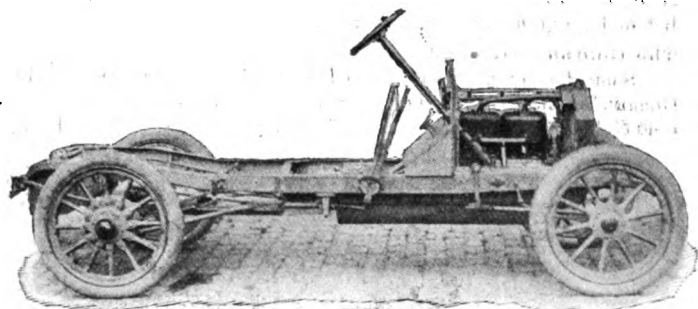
Chassis of the B.S.A. 18-23-h.p. Car.
